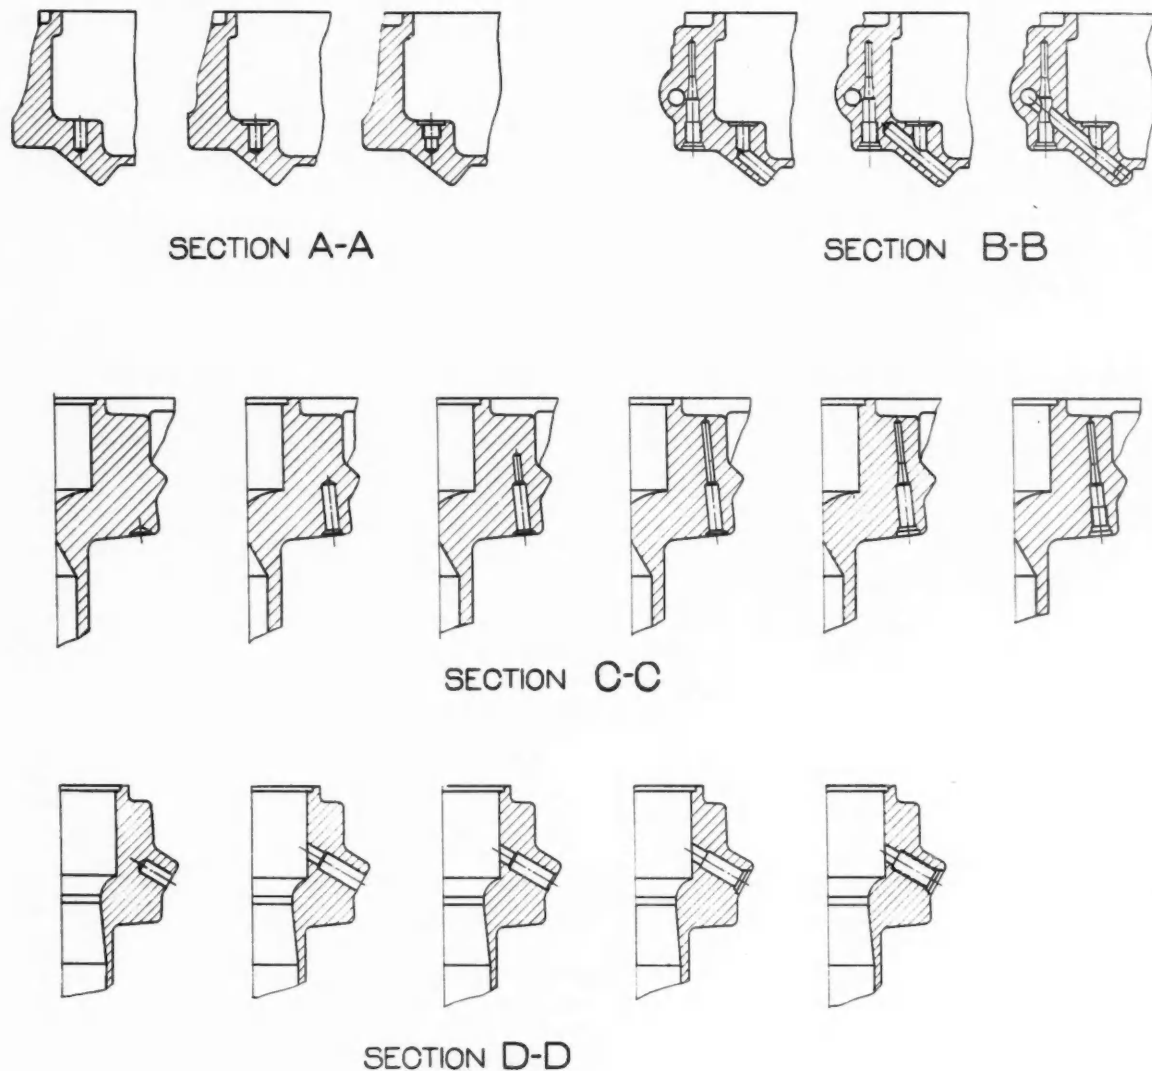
Cross-sections through a family of inter-connected passages in Chevrolet carburetor. Sketches designed to show sequence of separate operations required to produce each passage on multiple-head Kingsbury drilling and tapping machines
